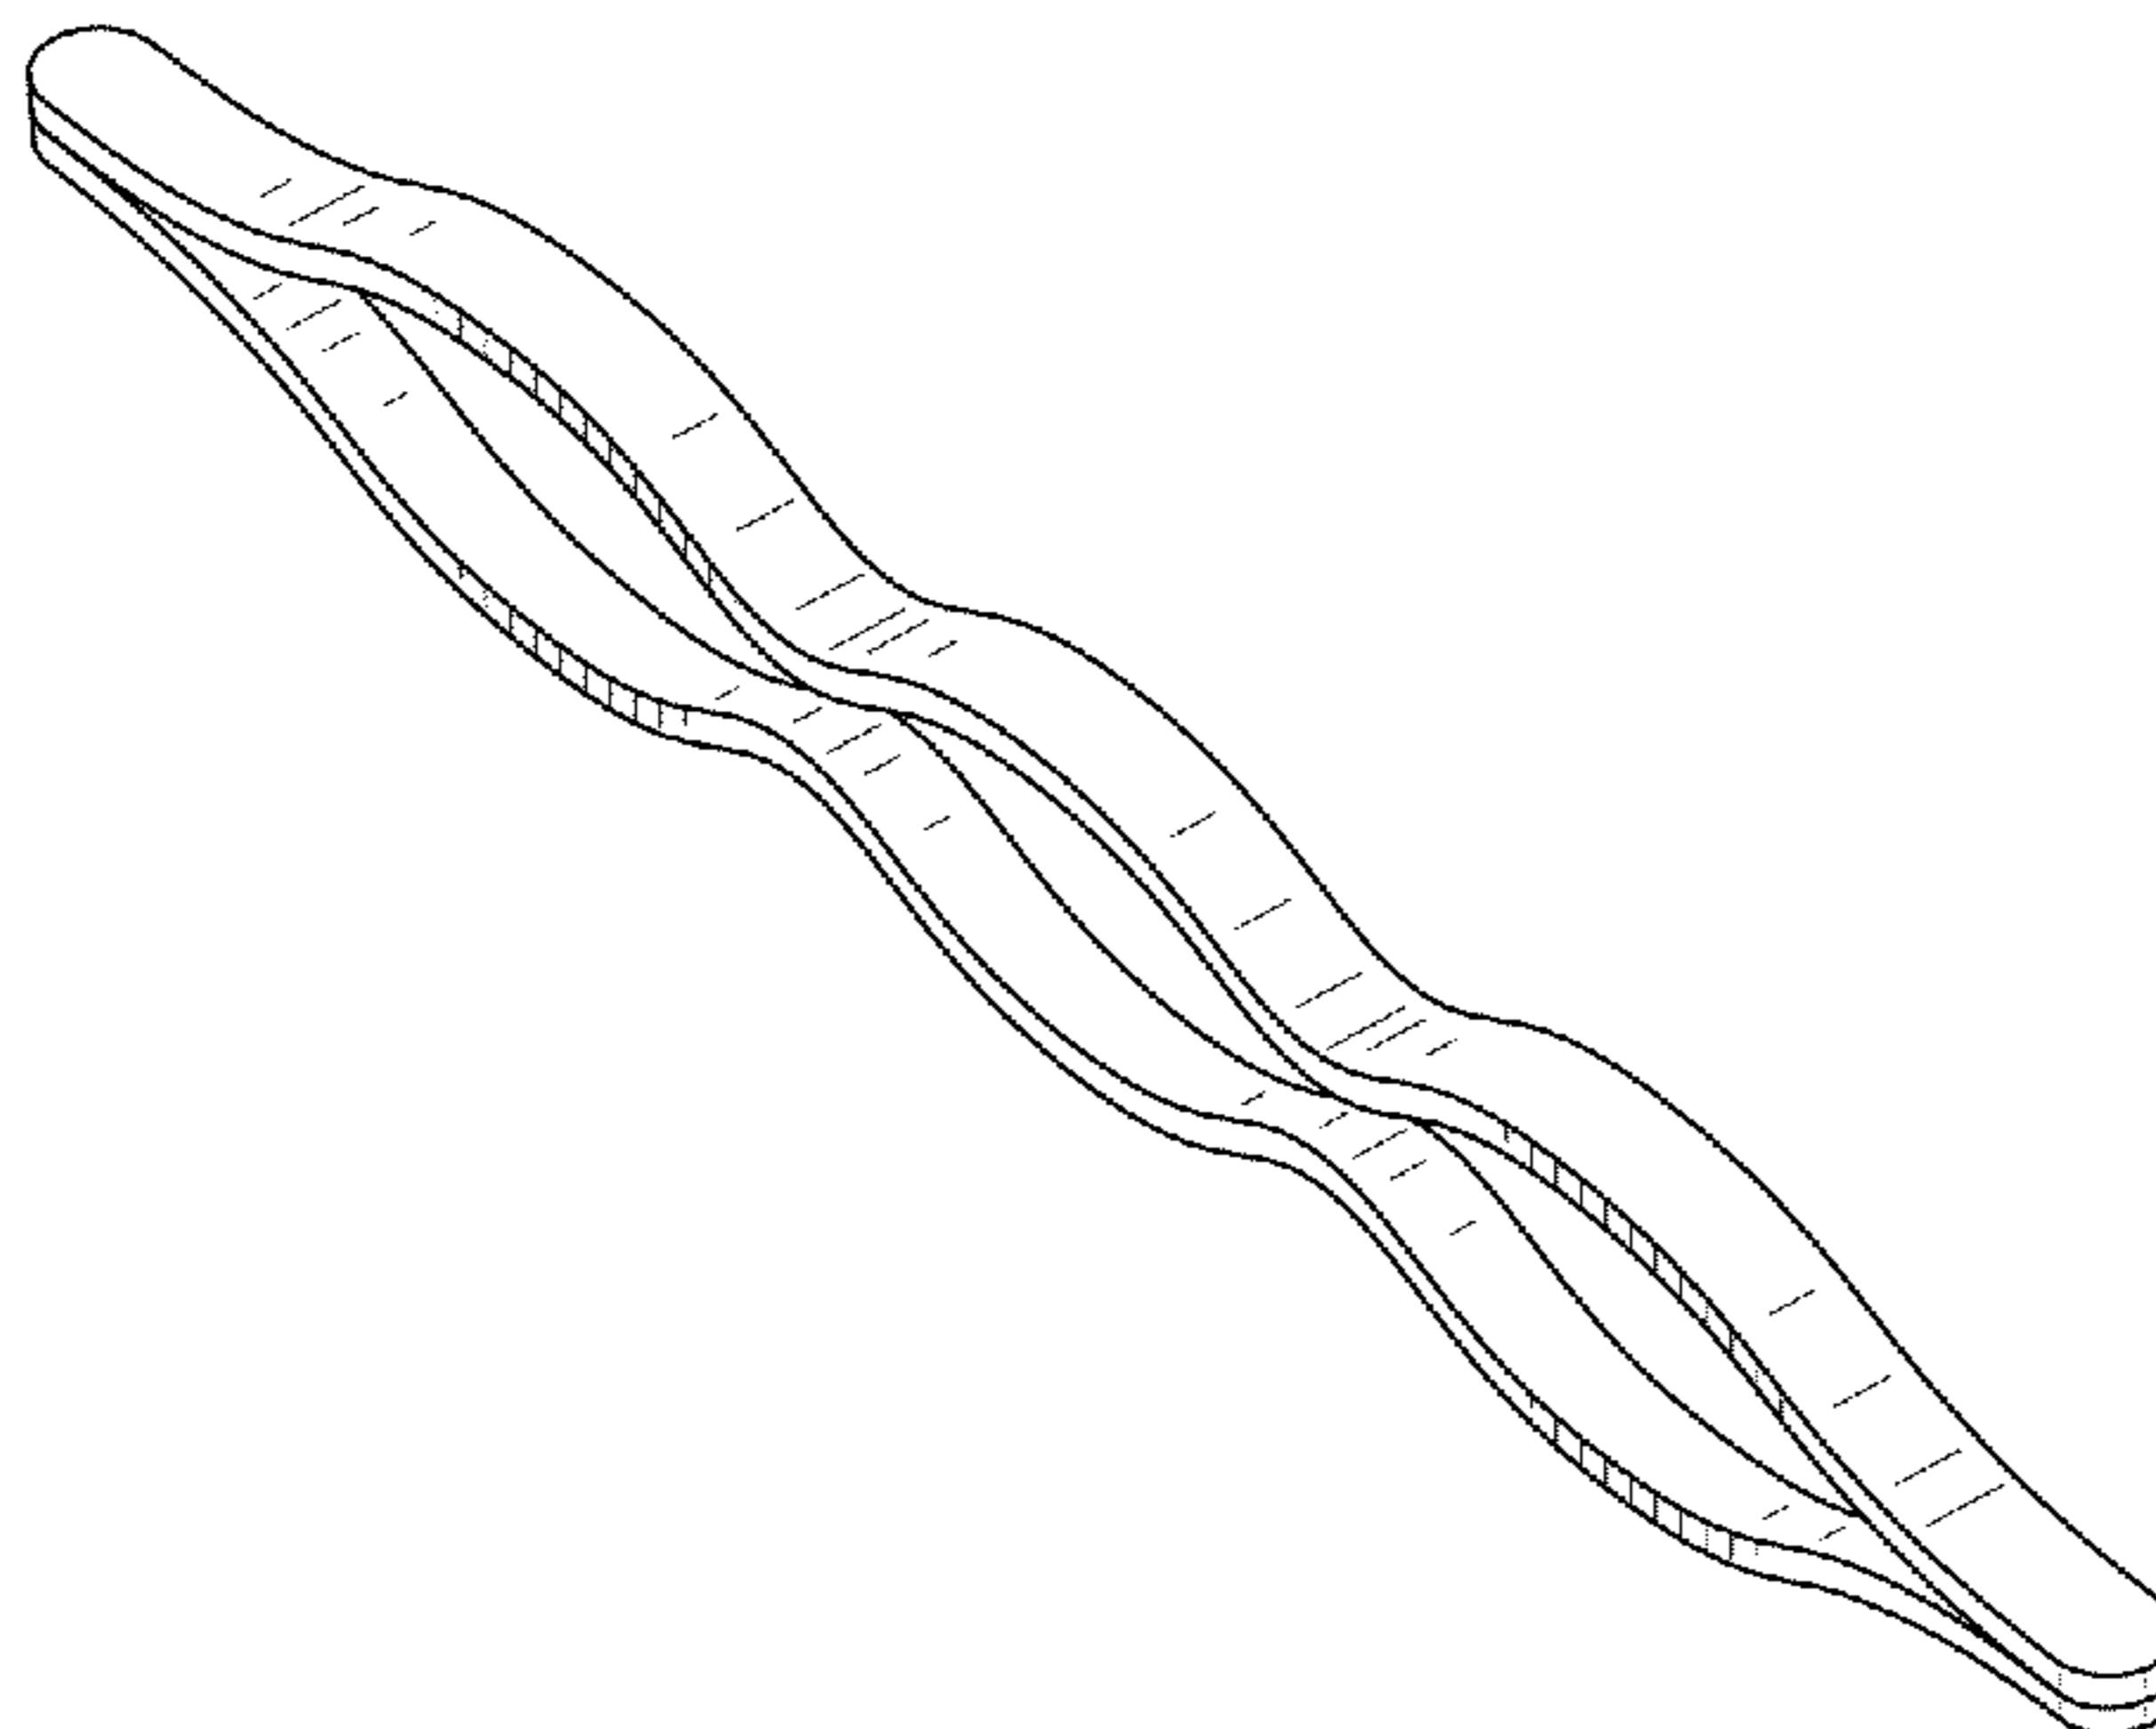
is a perspective view of the rotary valve spring, showing my design;
